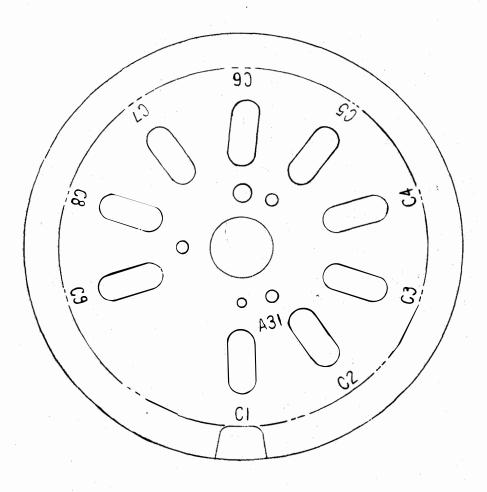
10 kHz Rotor Subassembly A2A4A31, Component Locations
